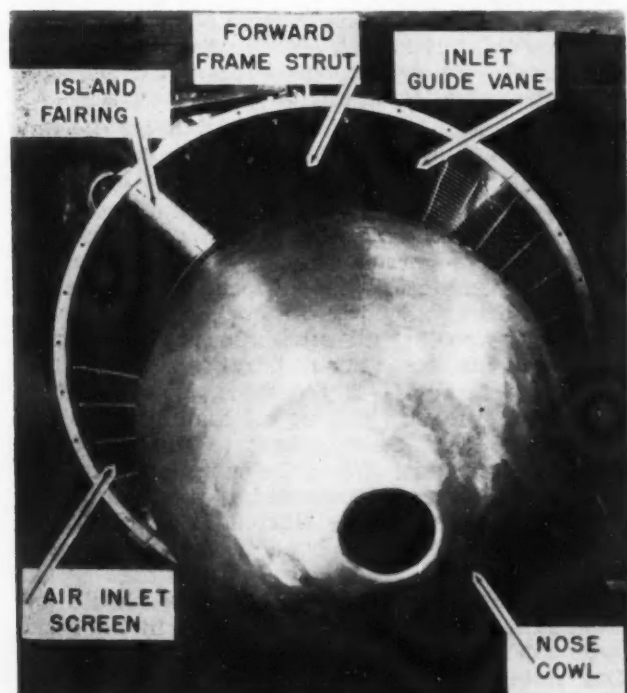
Anti-icing protection was provided for the air intake components of the J-47 turbojet engine shown
